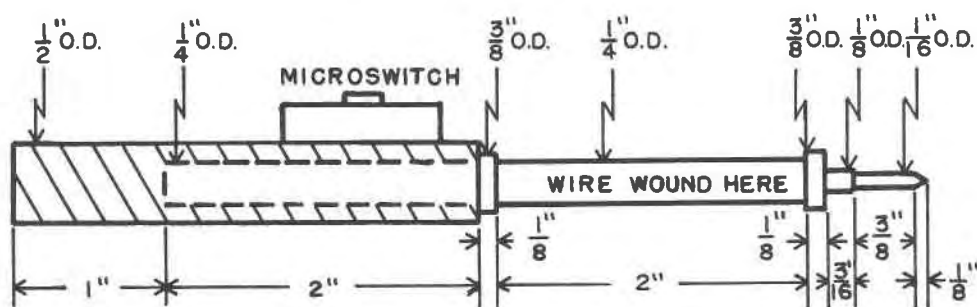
Detailed dimensions for soft iron core and wooden handle of probe.
